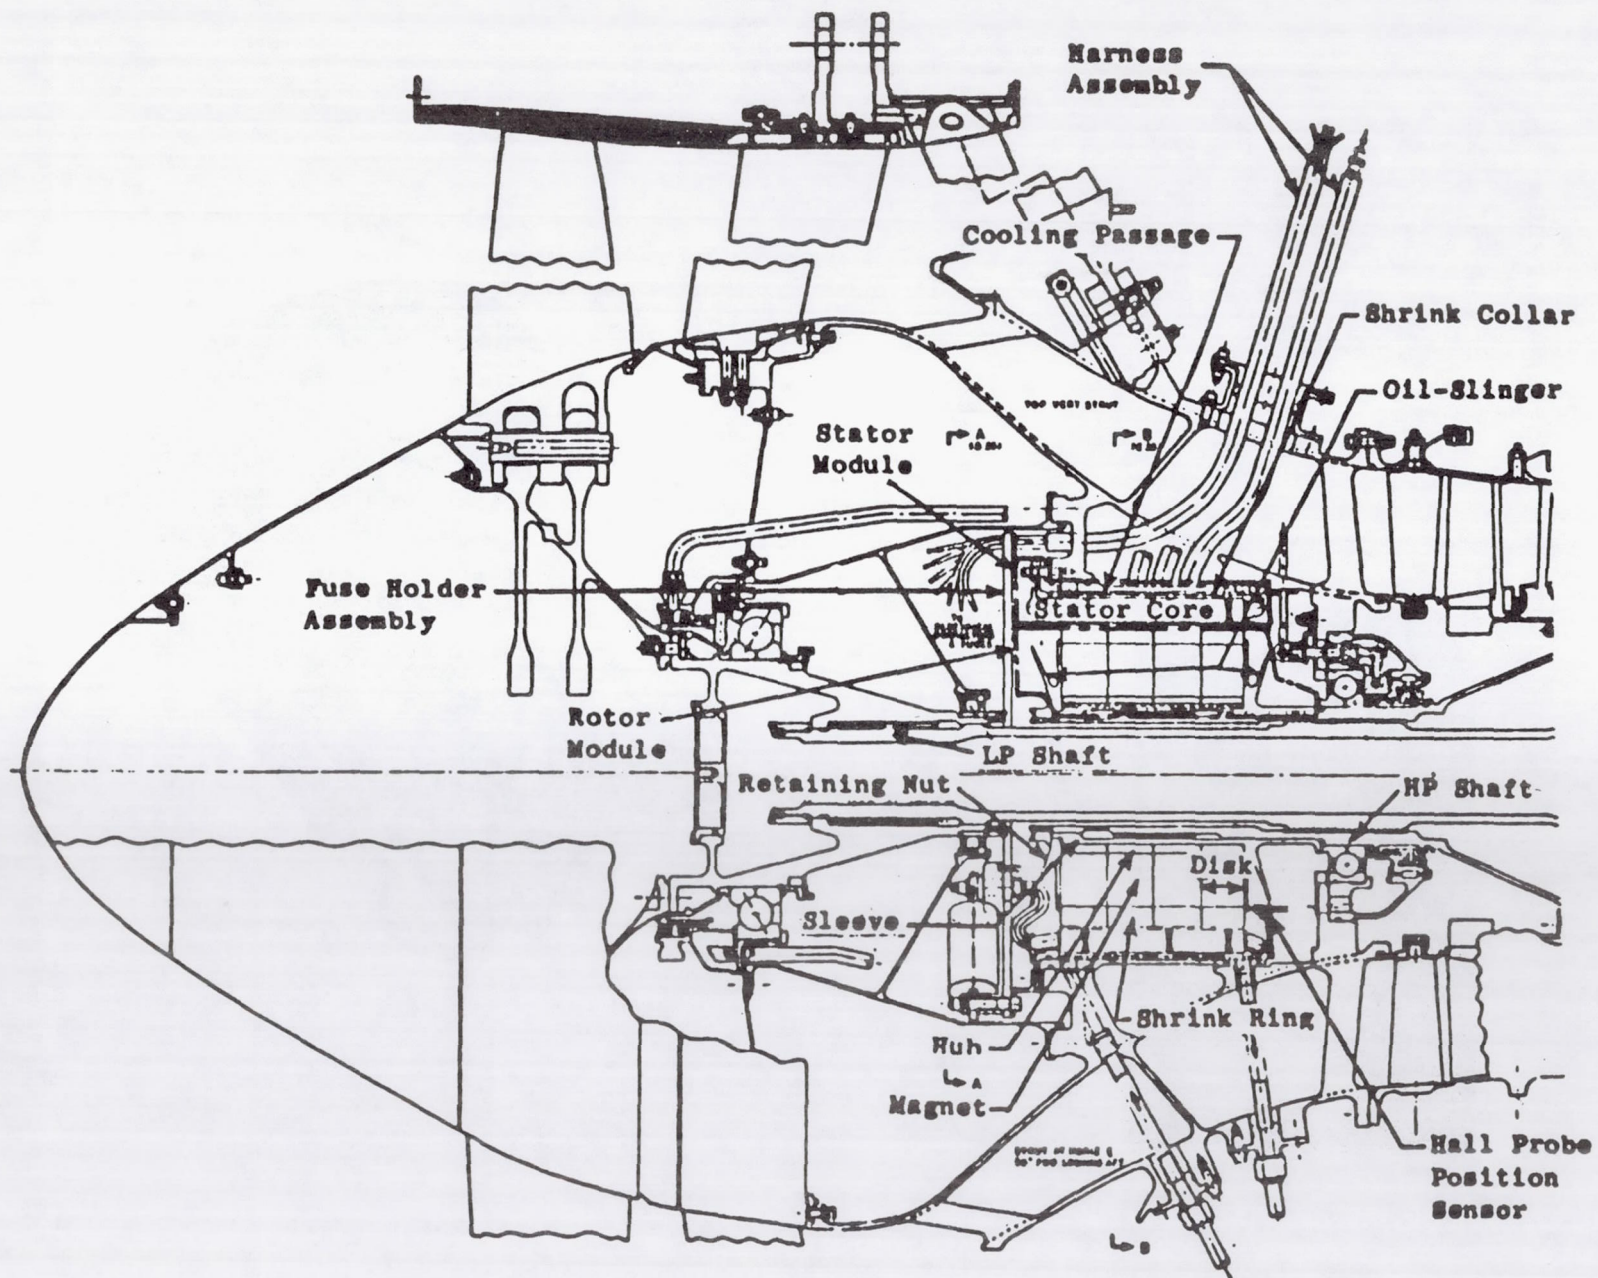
High-pressure-shaft-mounted, permanent-magnet integral engine starter-generator for TF-34 engine.
